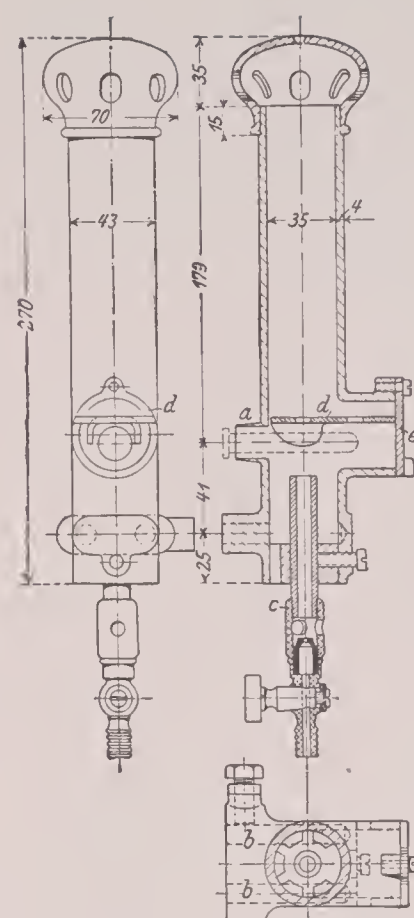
Hot Tube with Timing Valve, used on one of the older Körtzing Engines.
